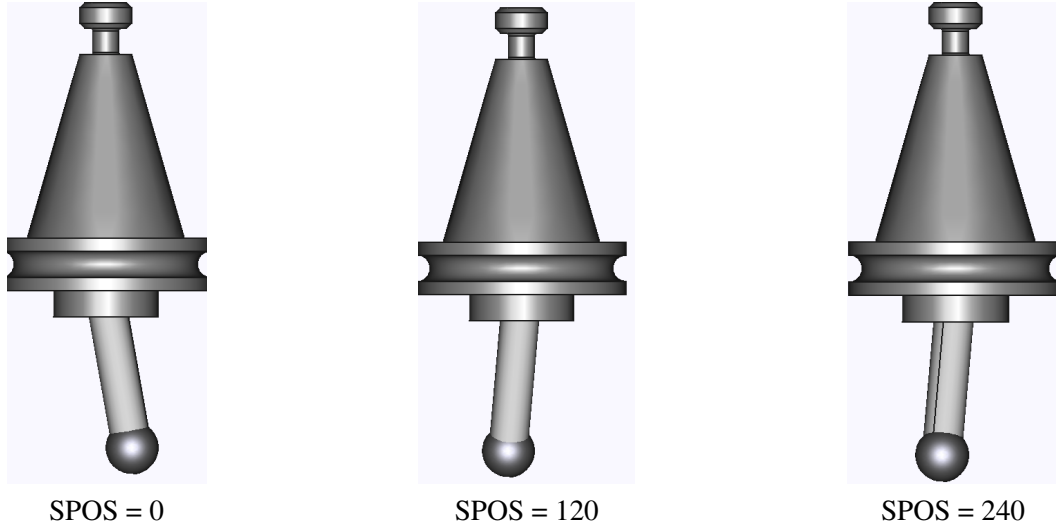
A misaligned tool-cup being rotated in the spindle of the machine tool
